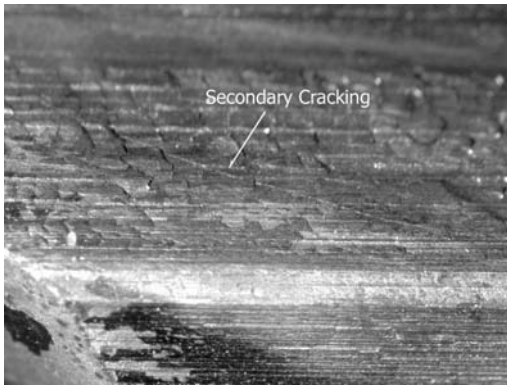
Secondary cracking evident at regions of abusive machining
